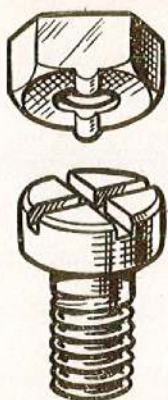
View showing lips of spring cup which engage with adjustment screw slots
